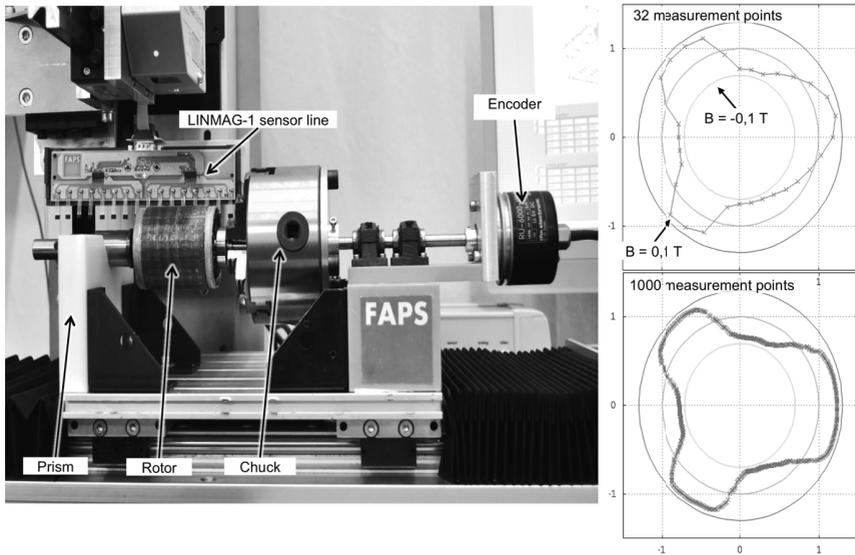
The fixture for the prototype provides trigger and fixation elements.
